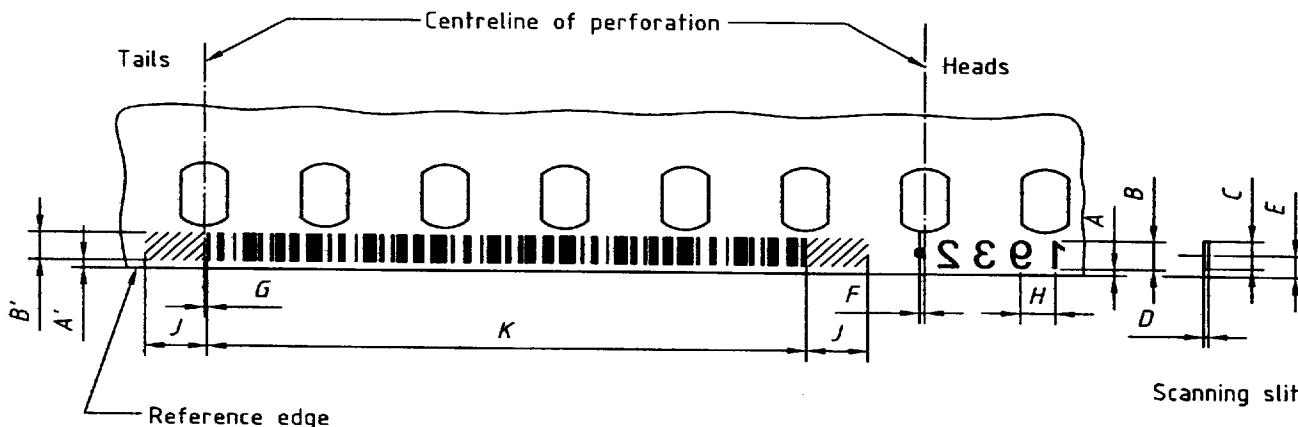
Key number position and dimensions on 65 mm film, format A and format B
